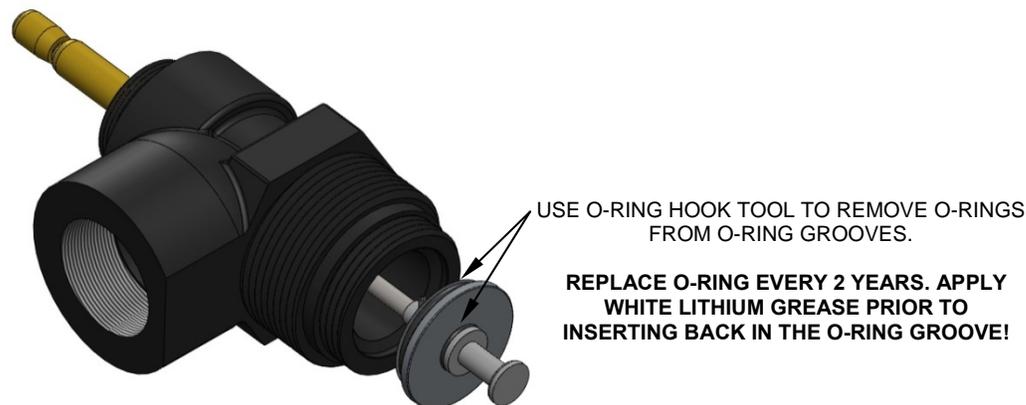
G – STEP 6 – Replace valve seat and valve stem base o-rings.
